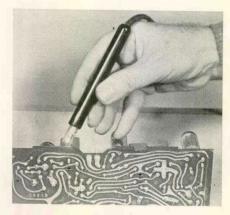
Printed or etched boards can be inspected far minute breaks using a lamp, holder and resistance cord.
